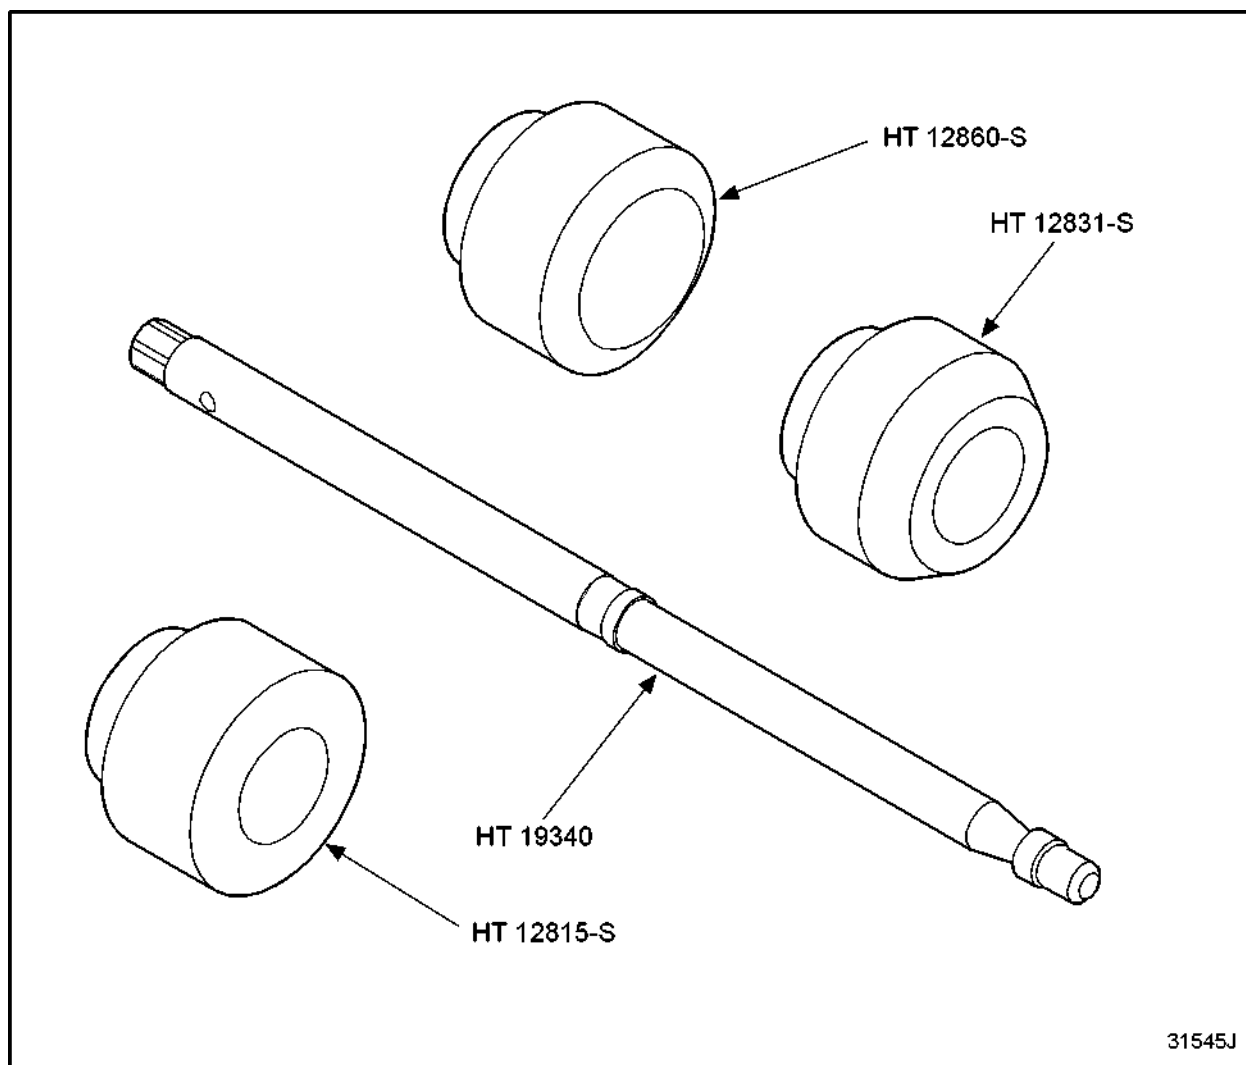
Valve Seat Grinder Adapter Kit, 149,J 4627-02
